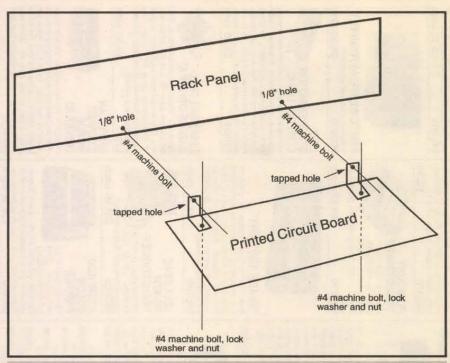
A printed circuit board mounts behind the front panel by means of two small angle brackets. The front holes of the brackets have been tapped to take #4 machine bolts, while the bottom holes accept #4 bolts, lock washers, and nuts.
